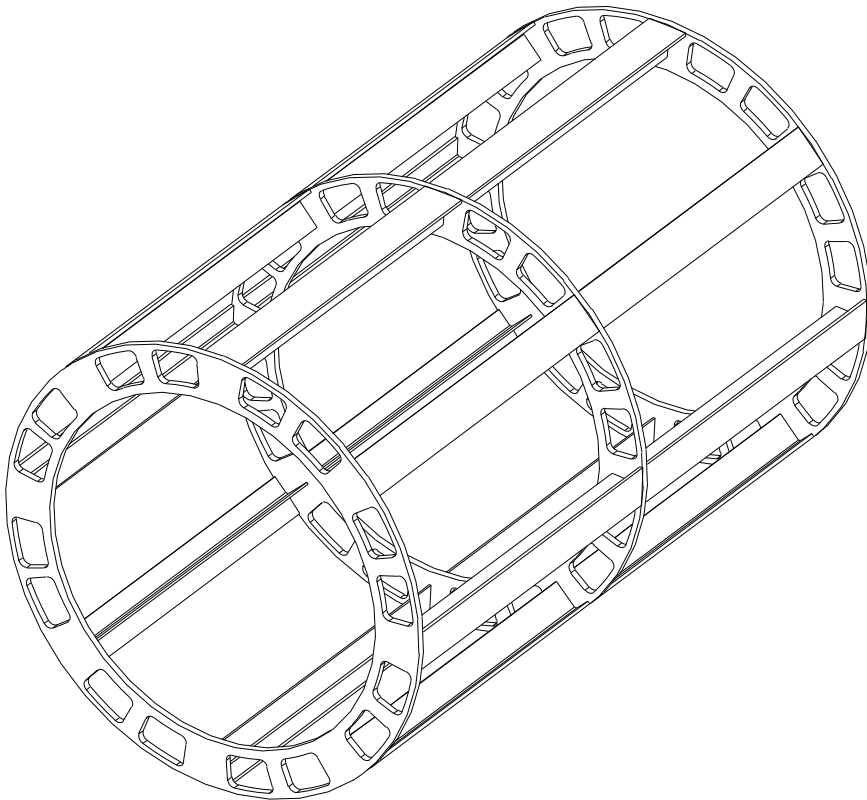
Isometric Drawing of a 3-rib detector cage.
